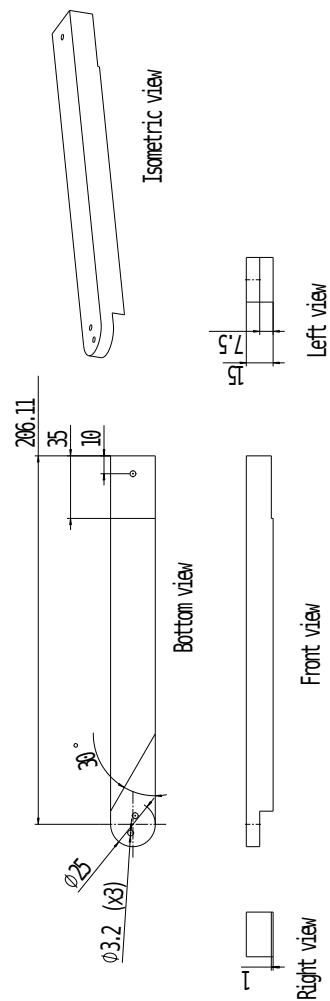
Technical drawing of the parts used for clamping the coupon in the fixture for the coupon level validation experiments.
